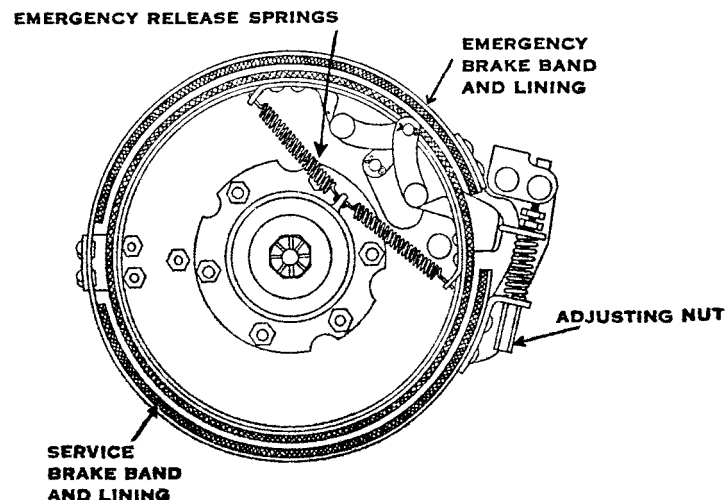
Two Wheel Band Type Brake (Solid Type Housing—10" Brakes)
